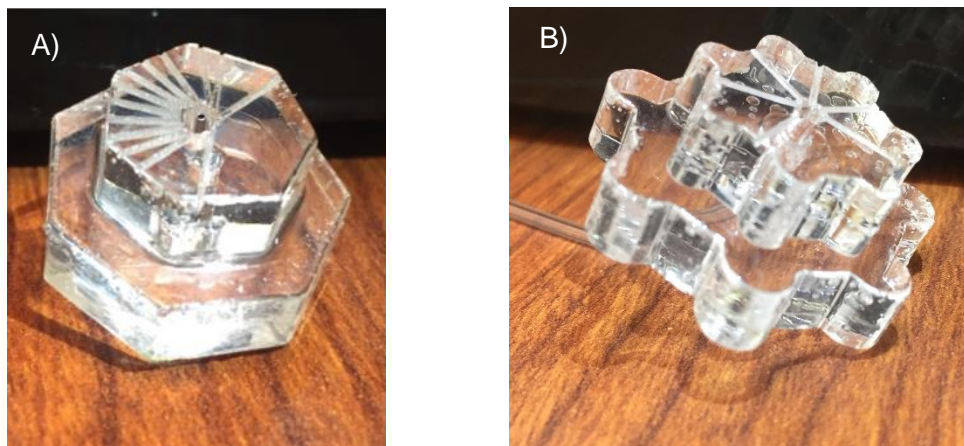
A) Heptagonal design B) Trench design. Both acrylic pieces were cut and engraved using the Epilog Laser Cutter.
